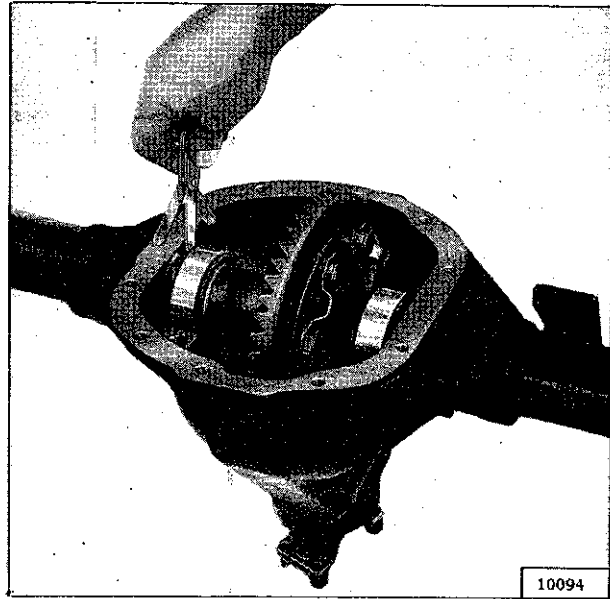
CHECKING DIFFERENTIAL BEARINGS
